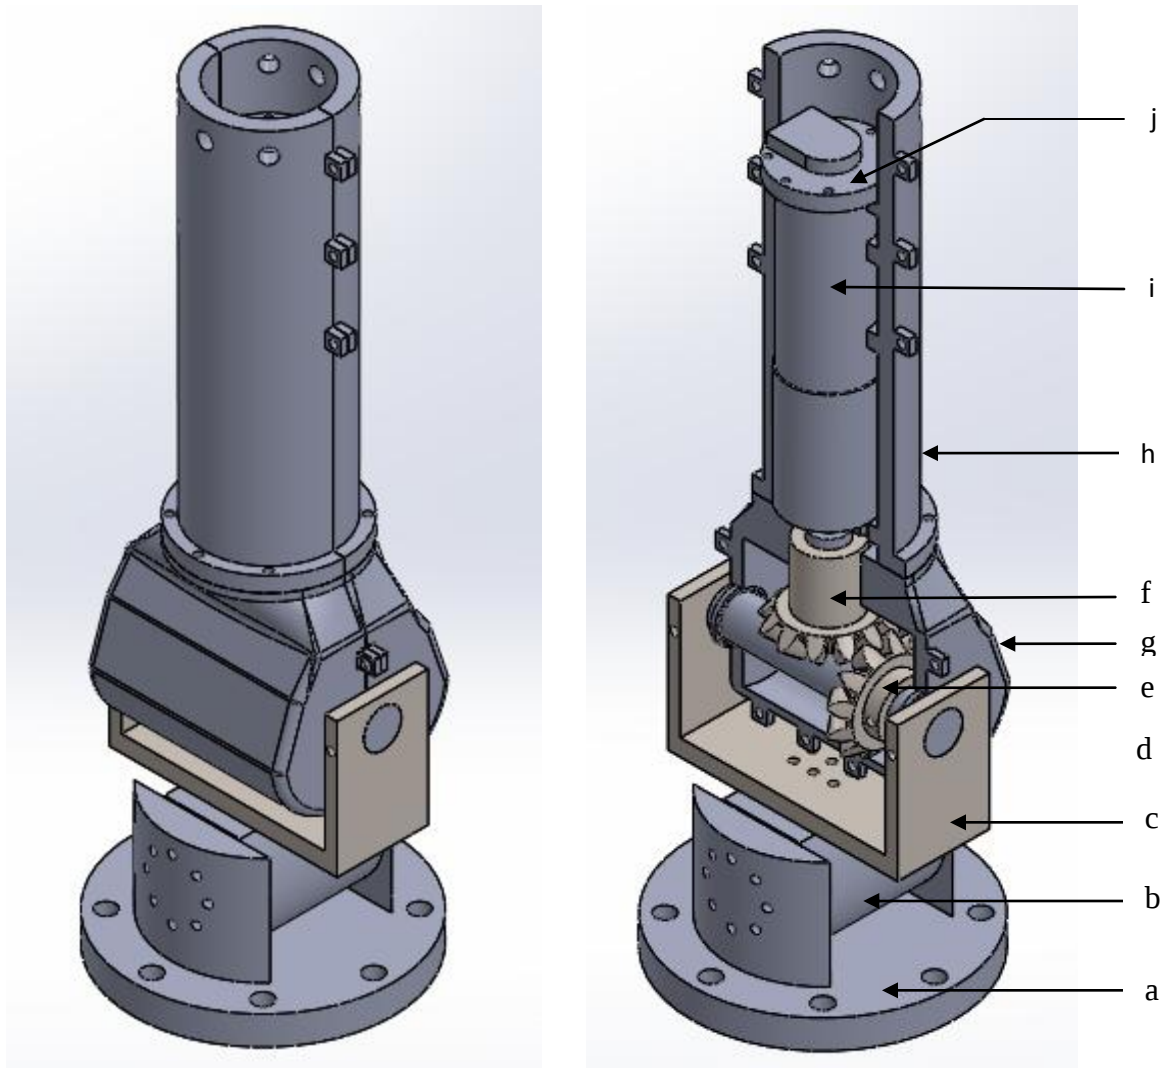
(a) Assembly of bevel gear approach (b) Assembly showing inner components
